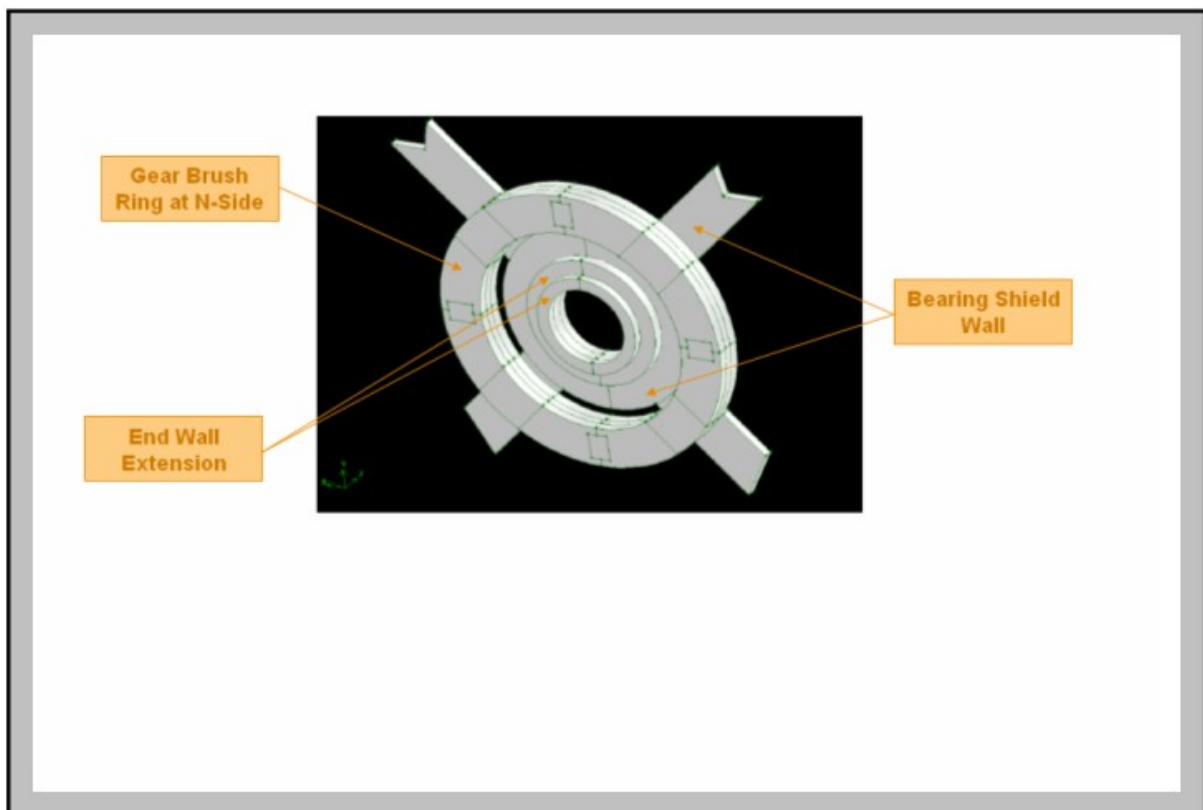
A side view of the solid of section C when the cover of the motor is taken away
